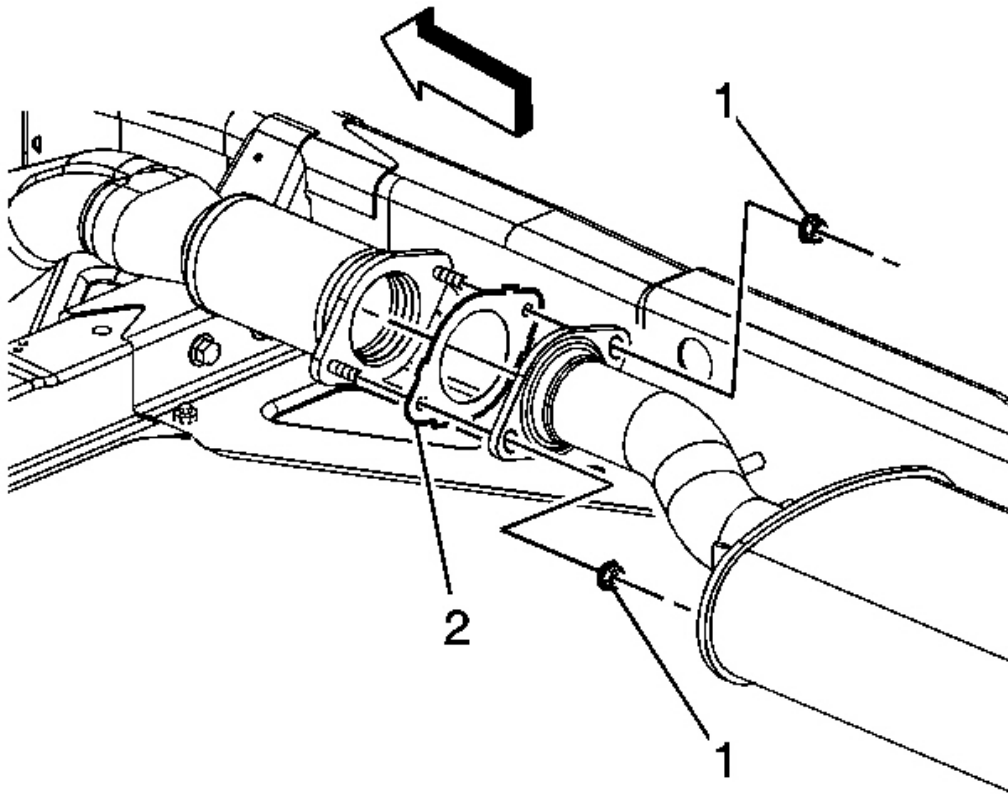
View Of Catalytic Converter, Muffler, Gasket & Nuts
